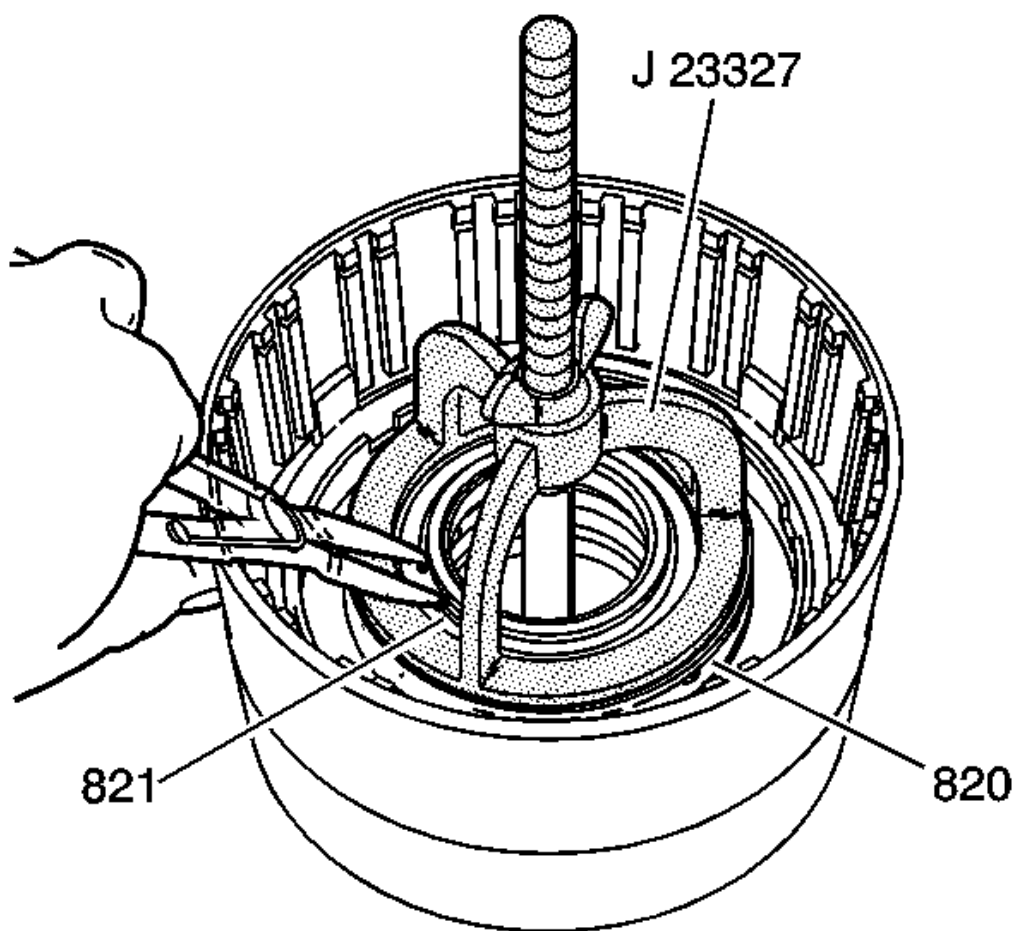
Compressing Spring And Retainer Assembly Into Forward And Coast Clutch Housing Using J 23327
